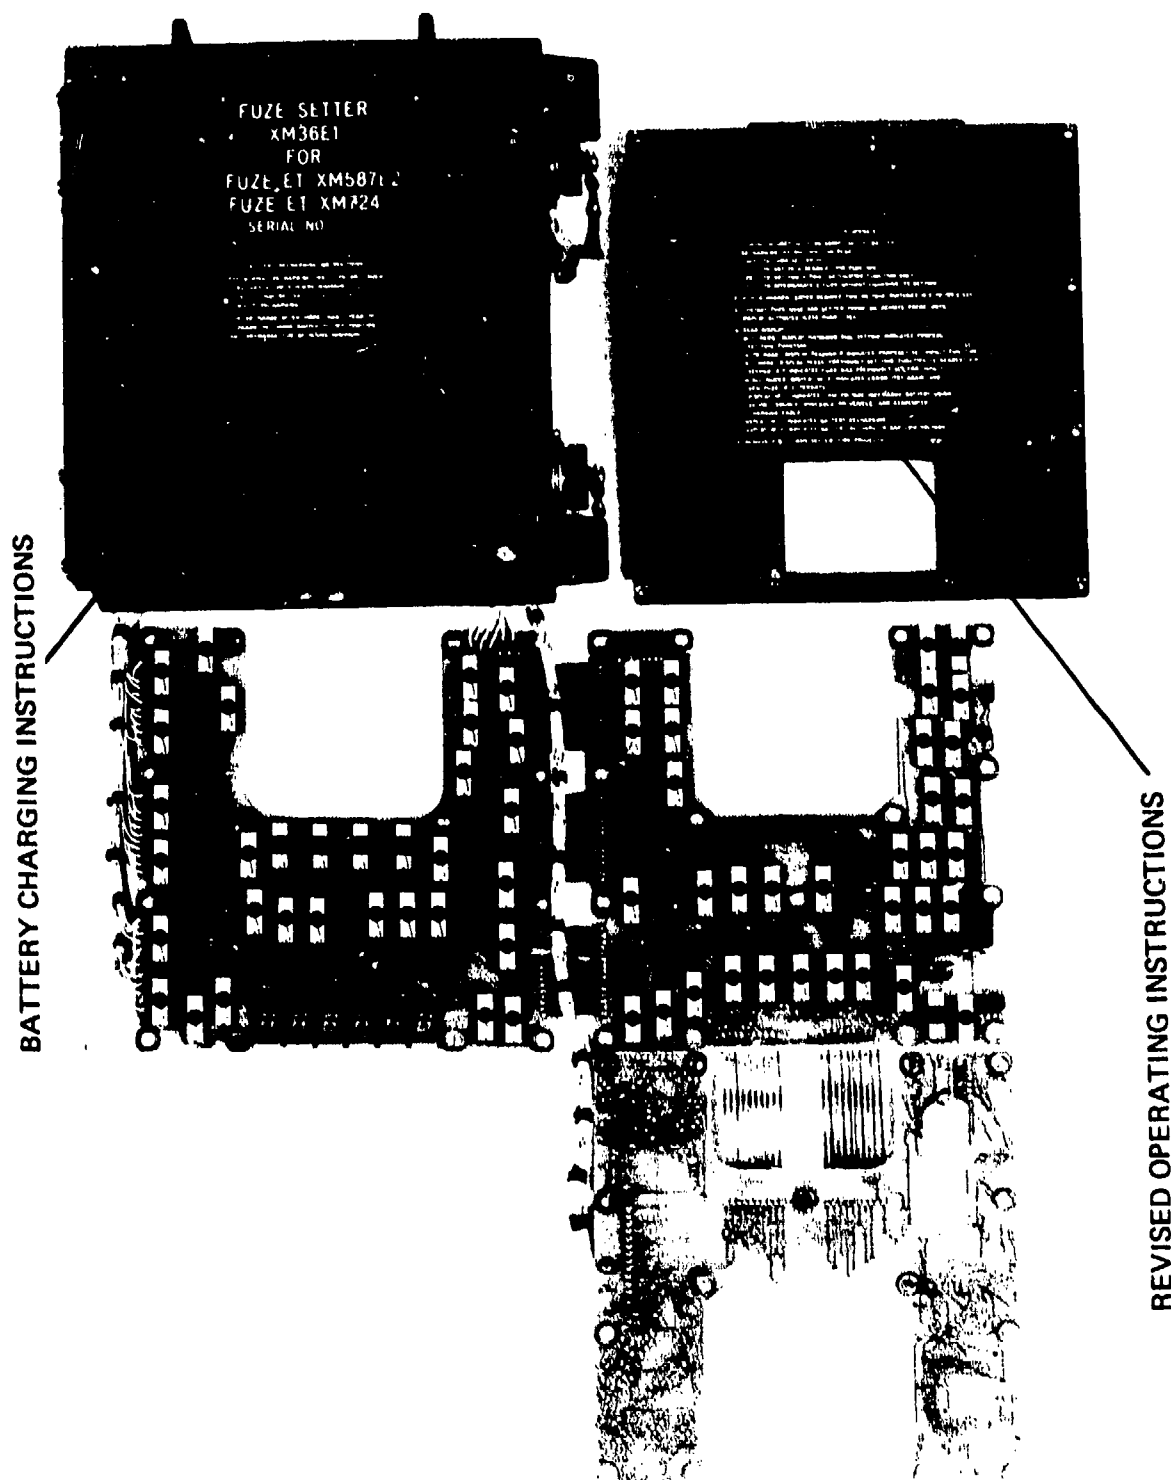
XM36E1 fuze setter with panel removed--bottom view.
